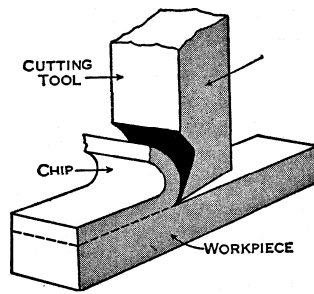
BASIC MACHINE-TOOL OPERATIONS: PLANING
